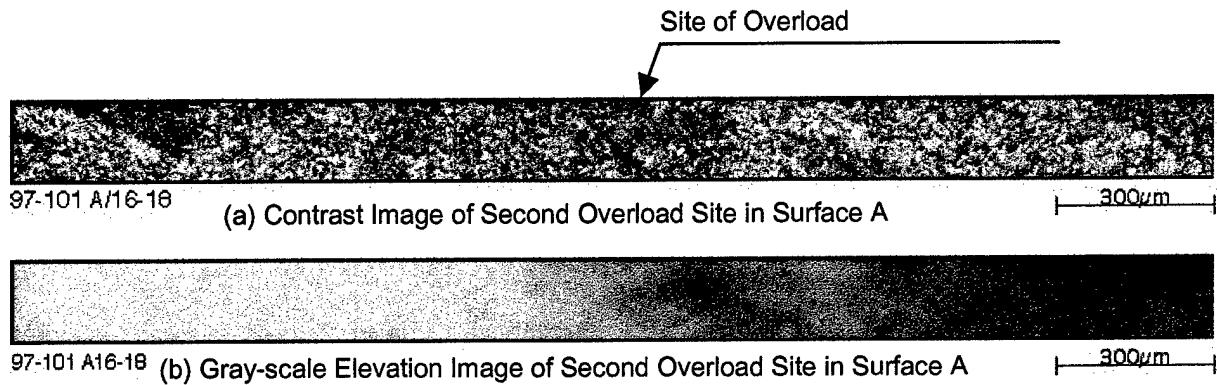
Contrast and gray-scale elevation images of fracture surface area surrounding overload site.
